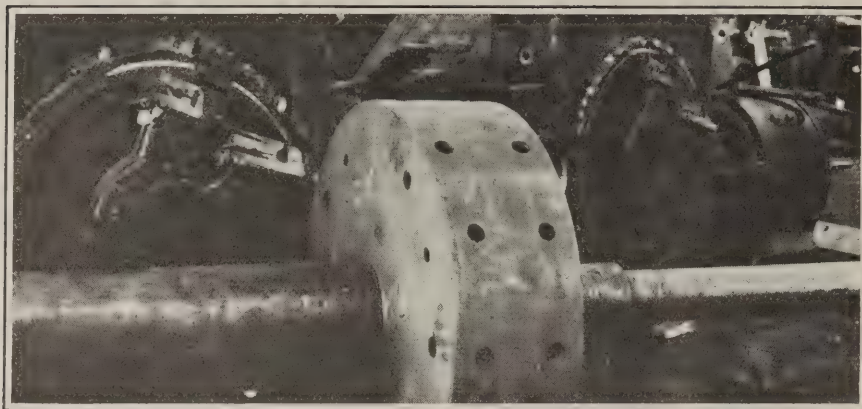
Mandrel Used for Swinging Motor Case in Lathe
